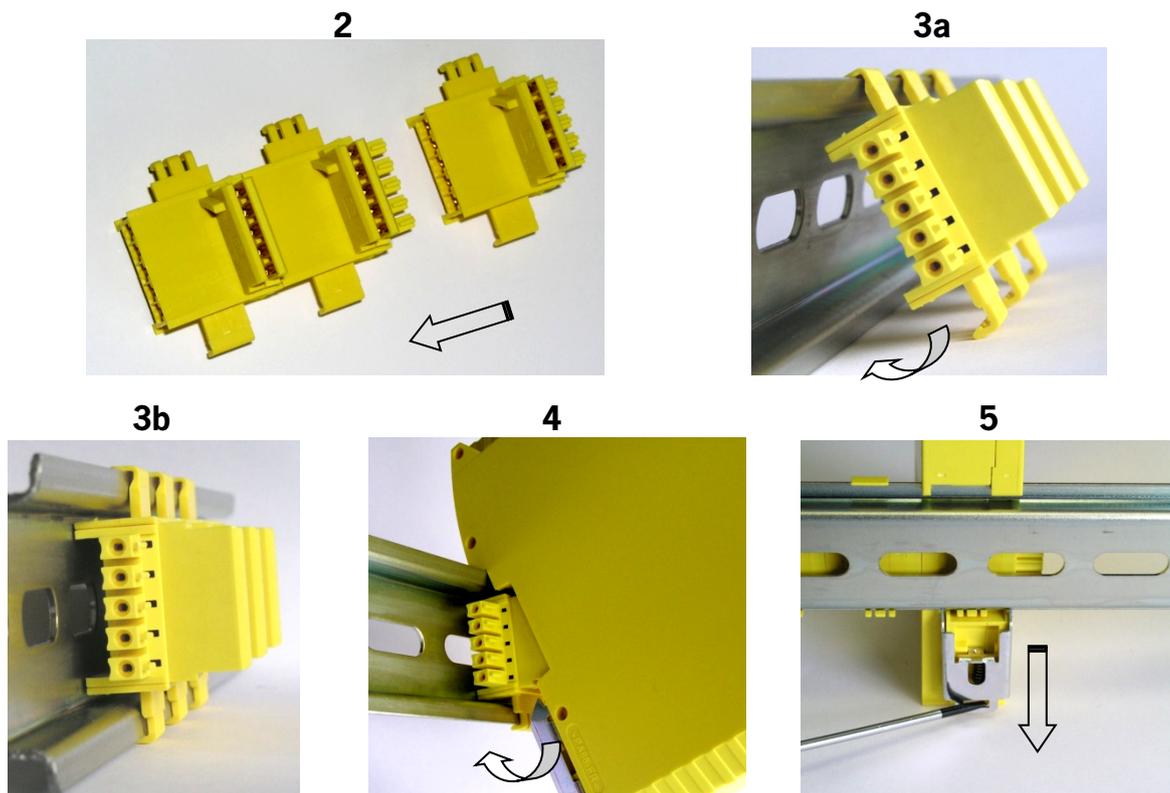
Fastening modules of the MSC system to a 35-mm DIN rail
